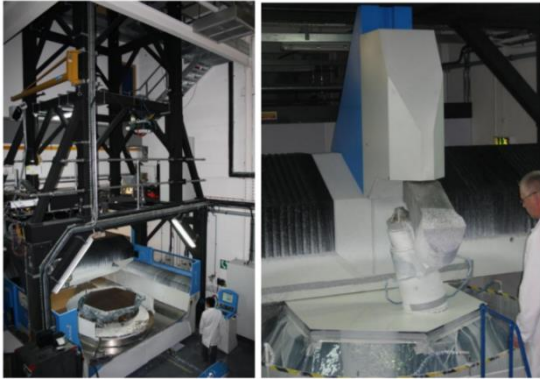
Zeeko IRP1600 polishing machine and Optical Test Tower [21].
